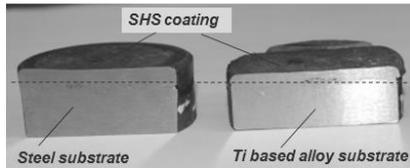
Exterior view of samples after SHS surfacing (cut-to-cross)
